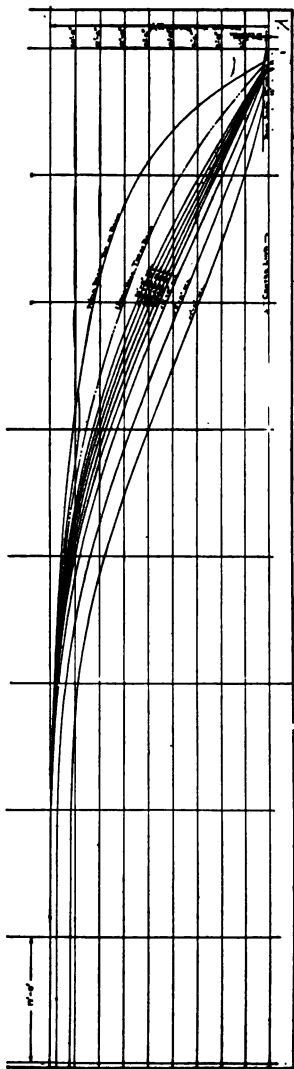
Standard Wooden Steamship—Half-breadth Plan—Moulded Lines—Stem.
